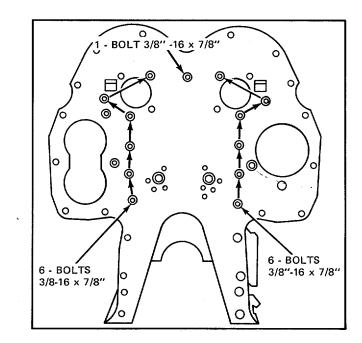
Cylinder Block Rear End Plate Mounting (In-Line Engine)
